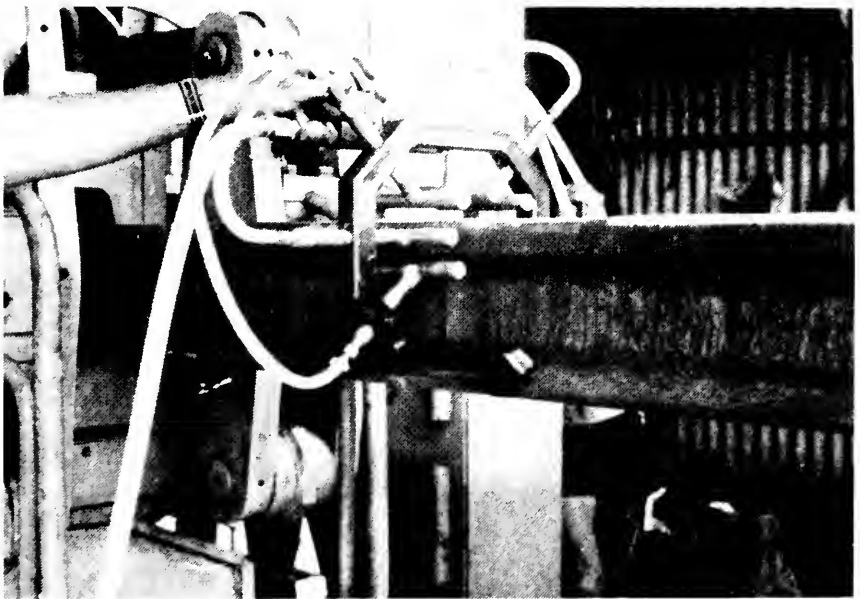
Air Quenching Apparatus for Electric Flashbutt Welds (Ref. 3).
